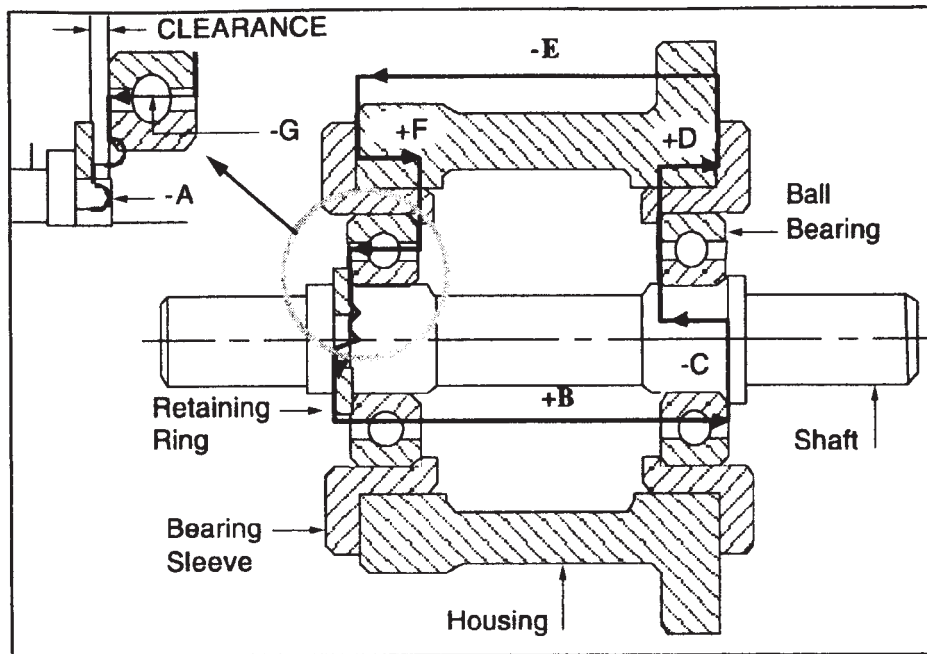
Example Problem 2: Shaft and bearing assembly. (Fortini, 1967)
